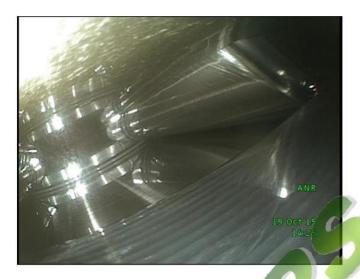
shows bearing position no. 7, the bearing of the low speed shaft at generator side. The bearing shows no irregularities.
